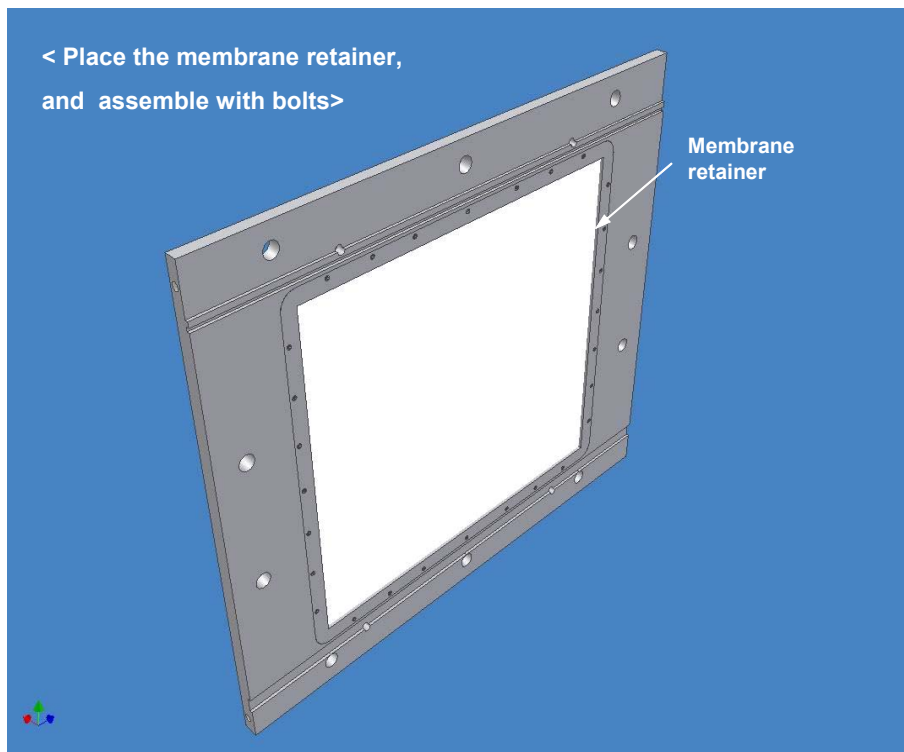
Step 48 (place the membrane retainer, and assemble with bolts)
